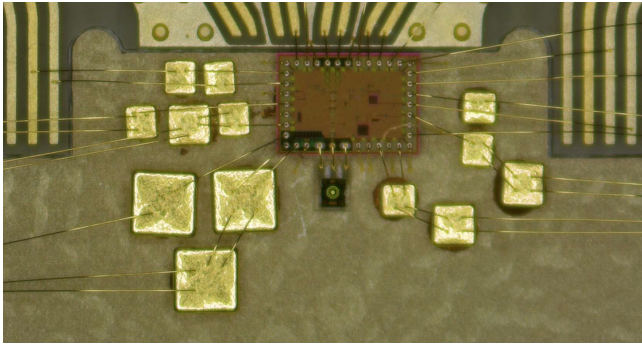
BMTIA together with APD in a wirebonded assembly. Die dimensions: 1.2 mm \times 1.7 mm.
